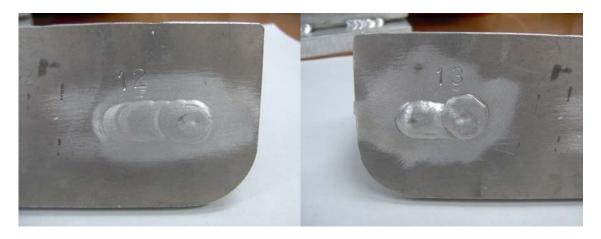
, Plug T-welds Weld 12 TIG, He-Ar mix, sample pre-heated by MIG Weld 13 MIG, He-Ar mix, cold sample
